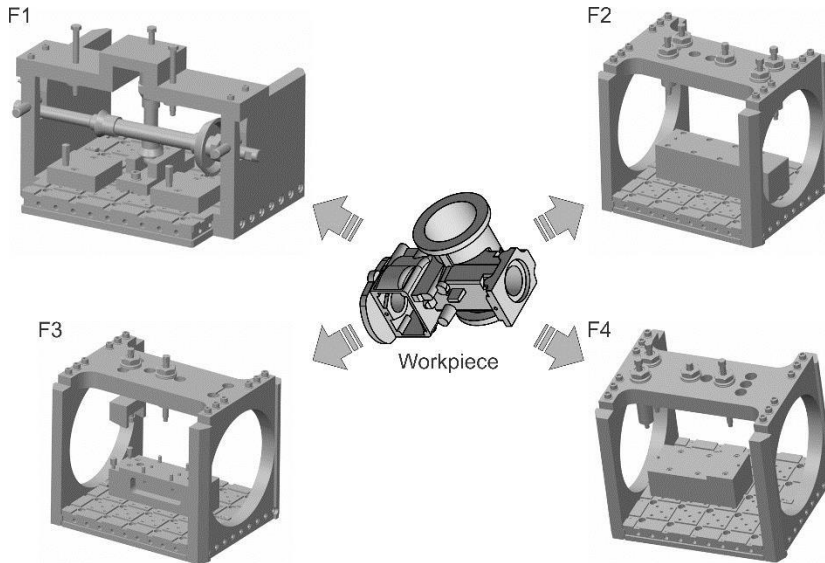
Workpiece and fixtures F1, F2, F3, and F4.
